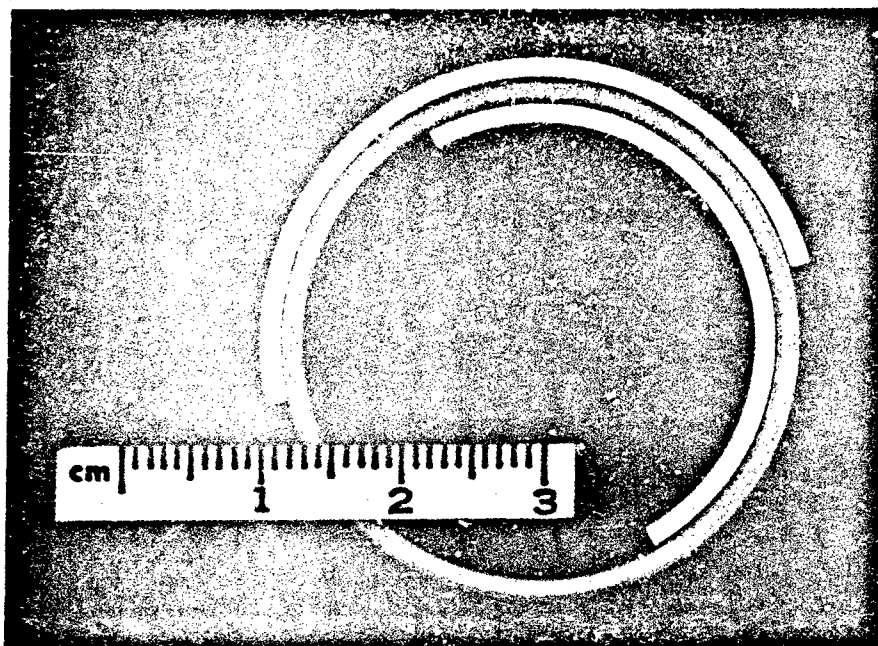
Welds made with sudden changes in heat sinking
